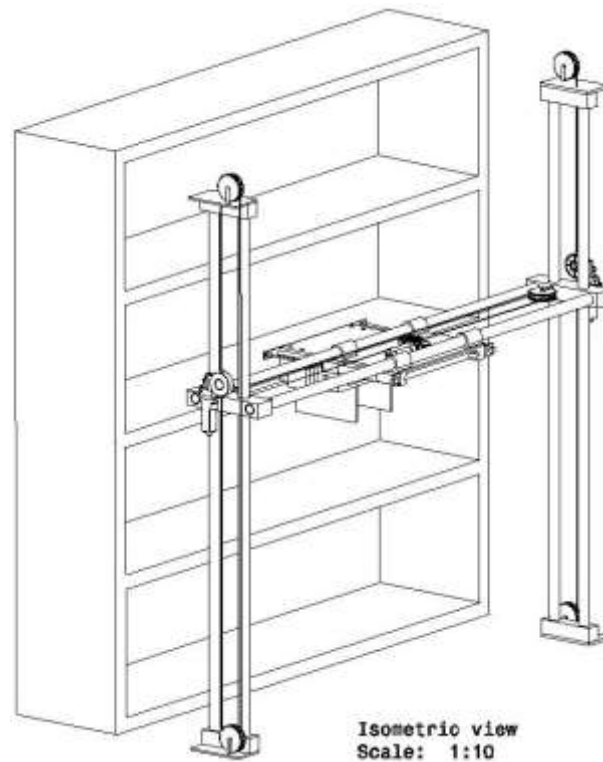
Isometric View of Complete Stationary Shelf Robot with Shelve
